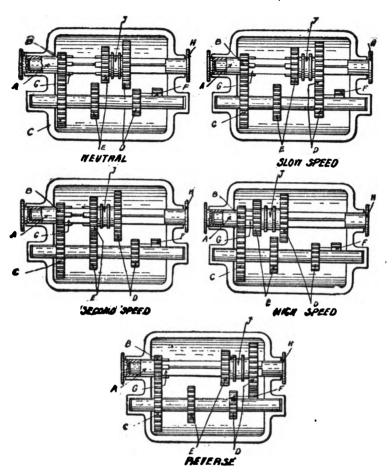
SLIDING GEAR—PROGRESSIVE TYPE. A, sleeve driven by engine; B, gear on sleeve; C, gear on countershaft; D, low-speed gears; E, second-speed gears; F, idler for reverse; G, clutch for high speed; H, connected to rear wheels; J, gears sliding on square shaft.
